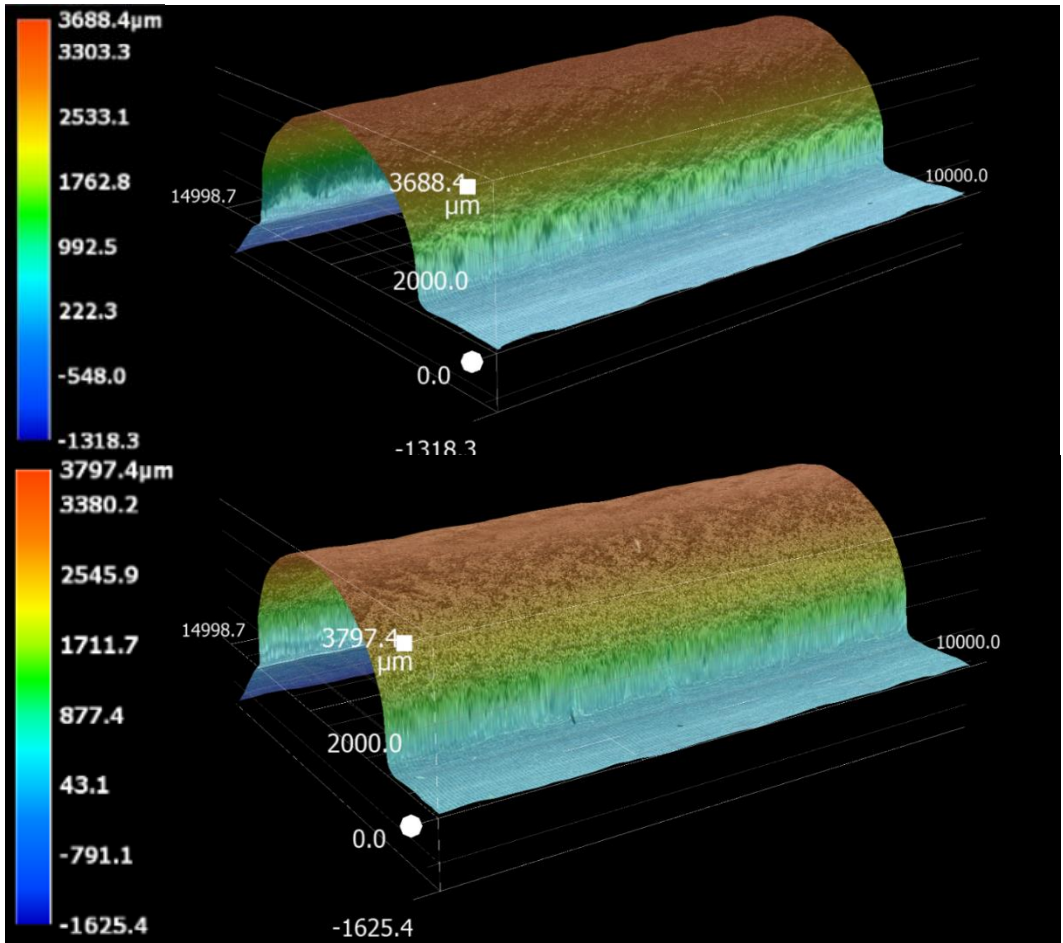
Recoater arm no. 4 before (top) and after (bottom) the print.
